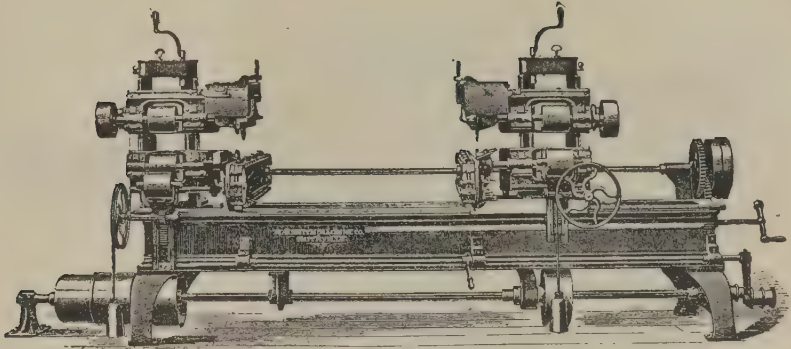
HEAVY END TRENCHING MACHINE WITH DOUBLE HEADS AND COPES.
